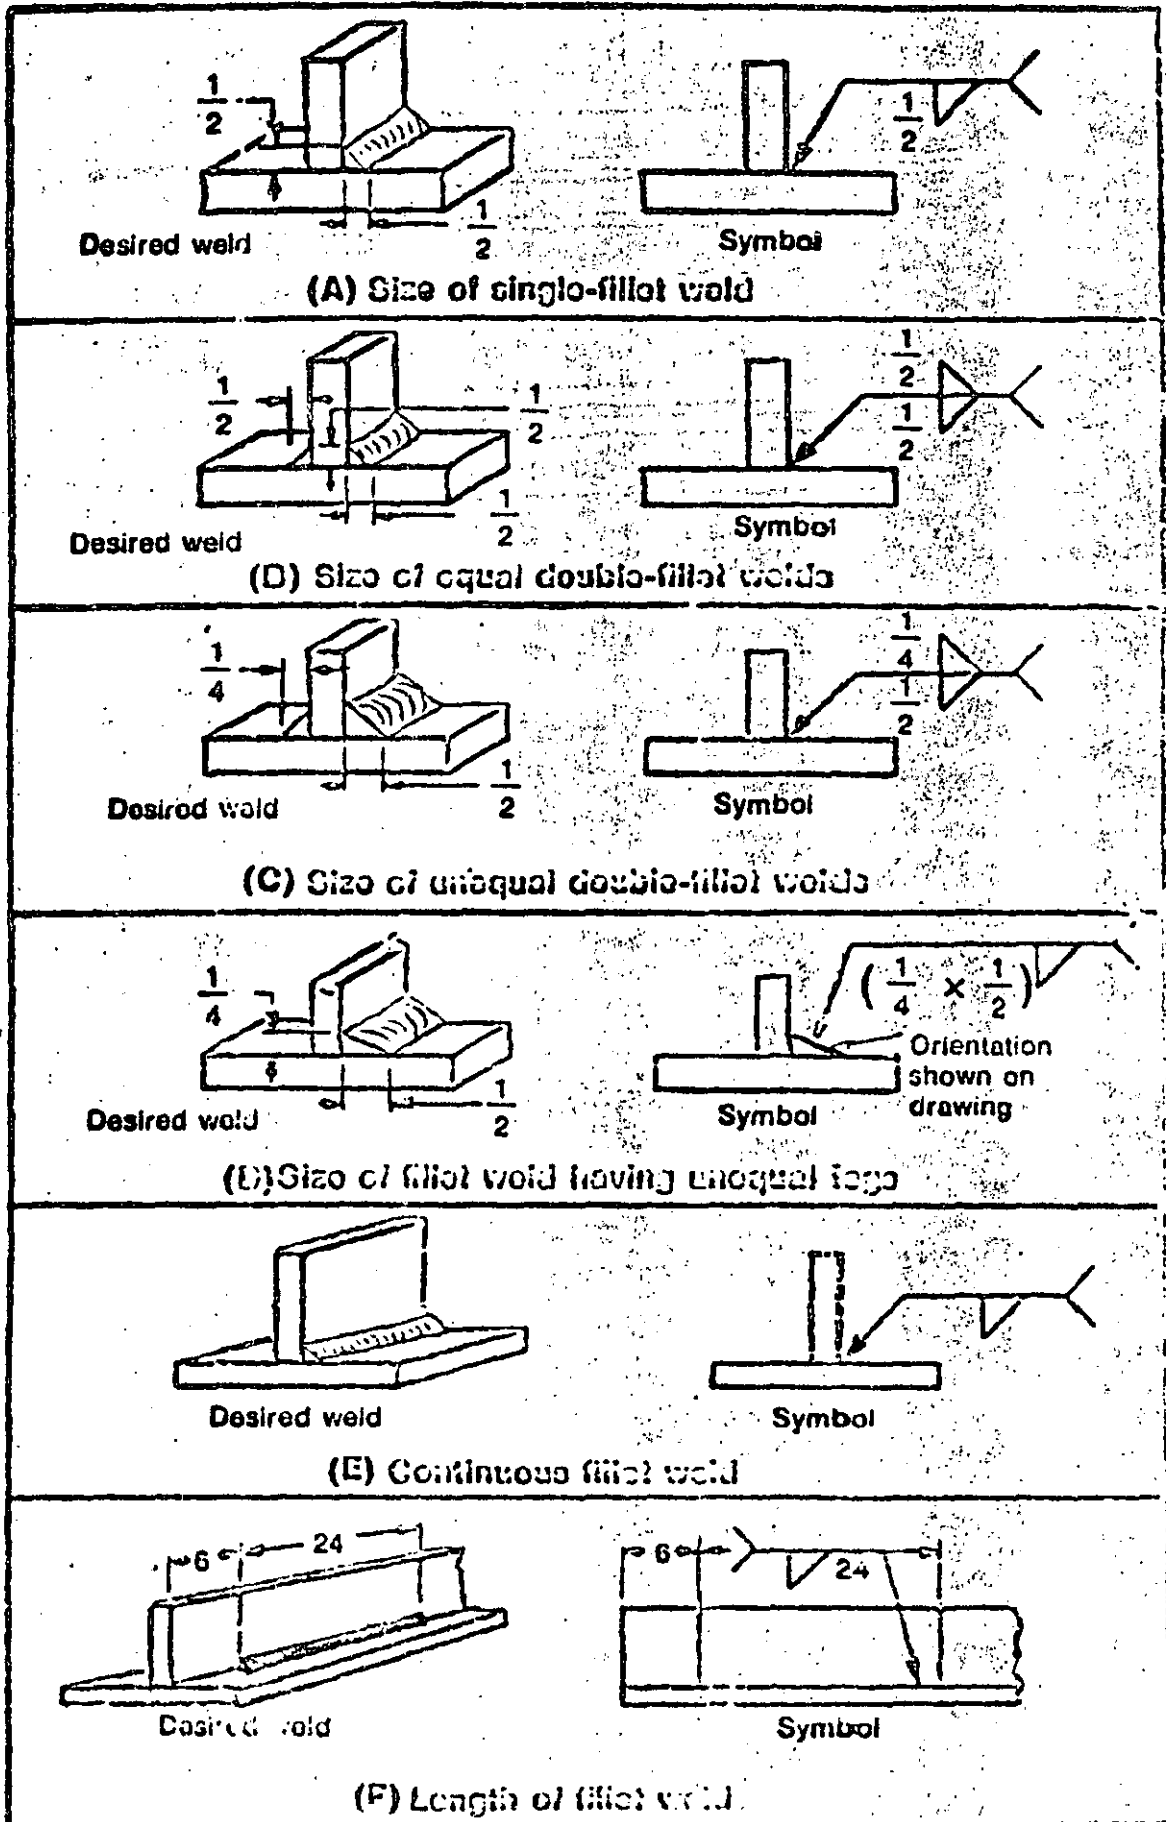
Application of dimensions to fillet weld symbols.
